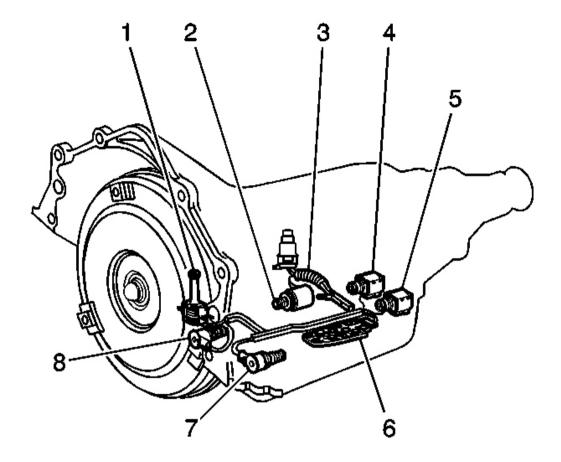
Locating Valve Body Electrical Components Courtesy of GENERAL MOTORS CORP.
